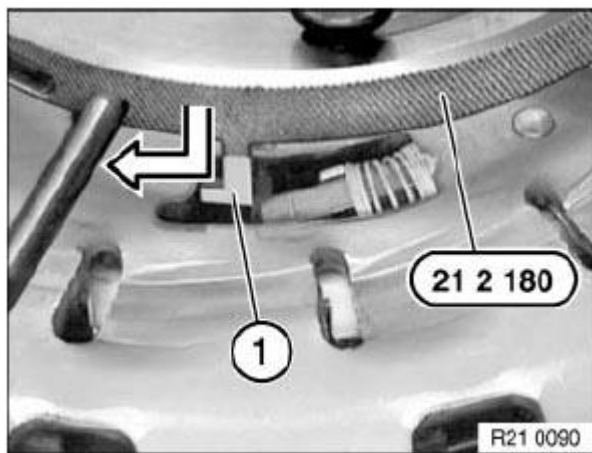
Identifying Locking Hooks Of Special Tool (21 2 180)
